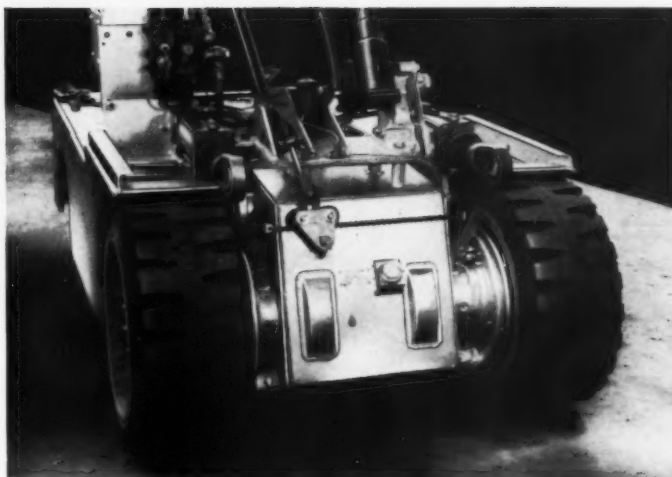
The 624E is based on a robust all-welded chassis
